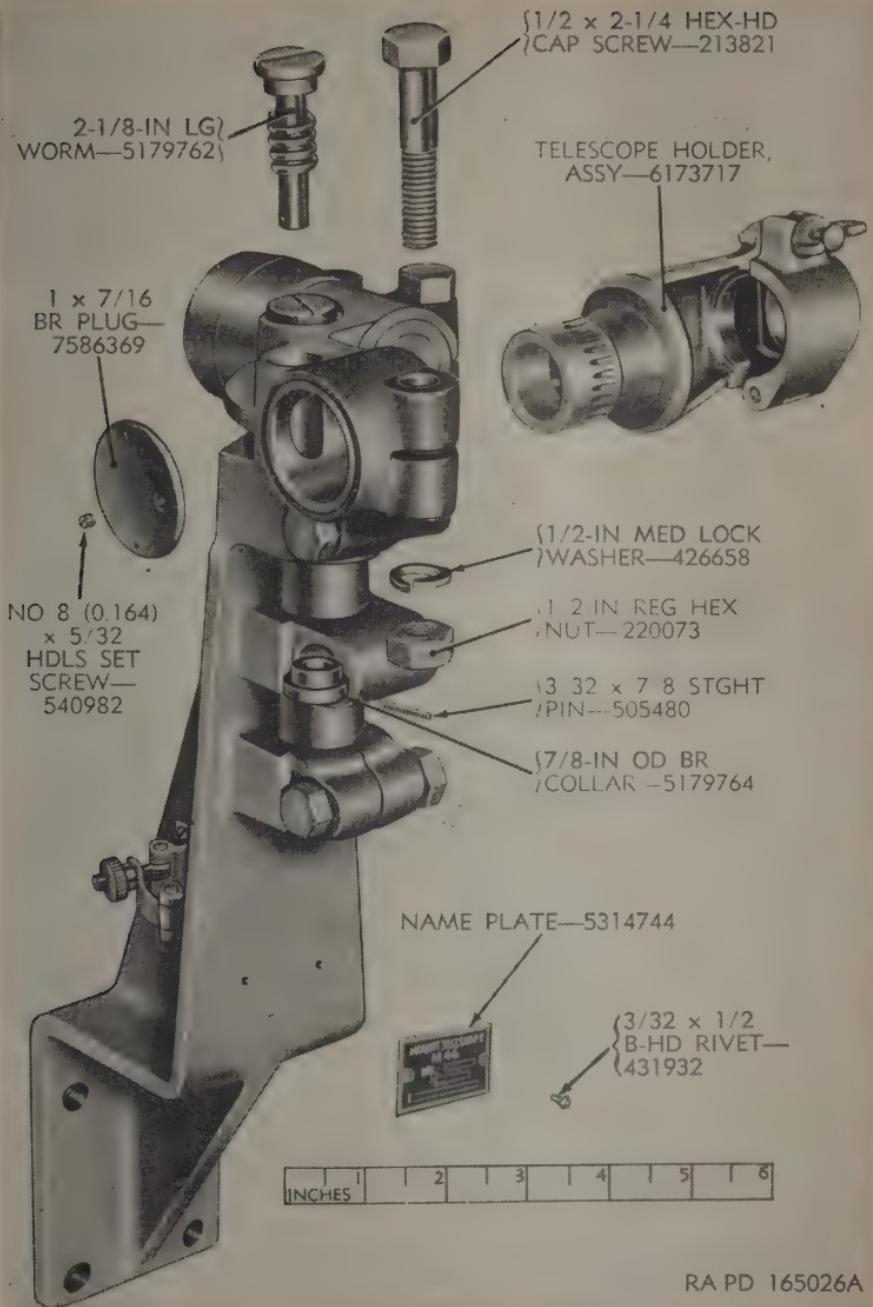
Telescope mount M46—removal of the telescope holder assembly.
